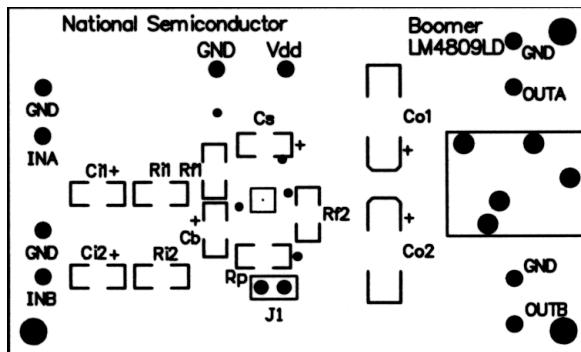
Recommended NGL0008B PC Board Layout Component-Side Silkscreen
